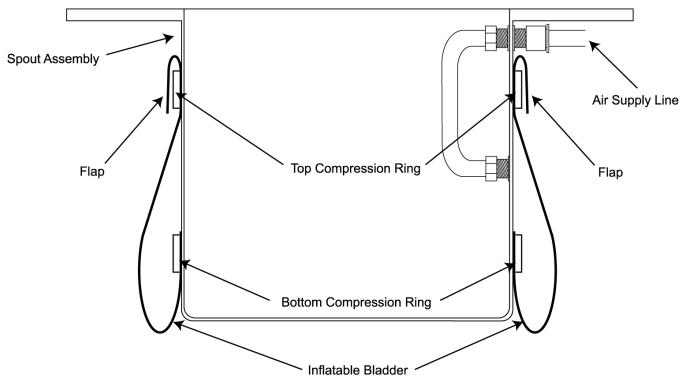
Section View of Open Mouth Bag Spout and Inflatable Bladder
